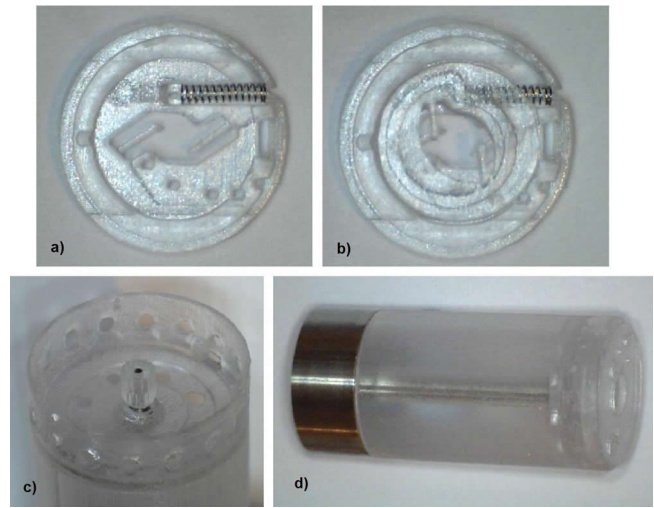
Assembled needle positioning mechanism. a) shows the needle funnel, spring and needle assembled b) shows the needle cam in position c) shows the ratchet and case cavity and d) shows the case fitted with the mechanism and coupled to a drive spindle
